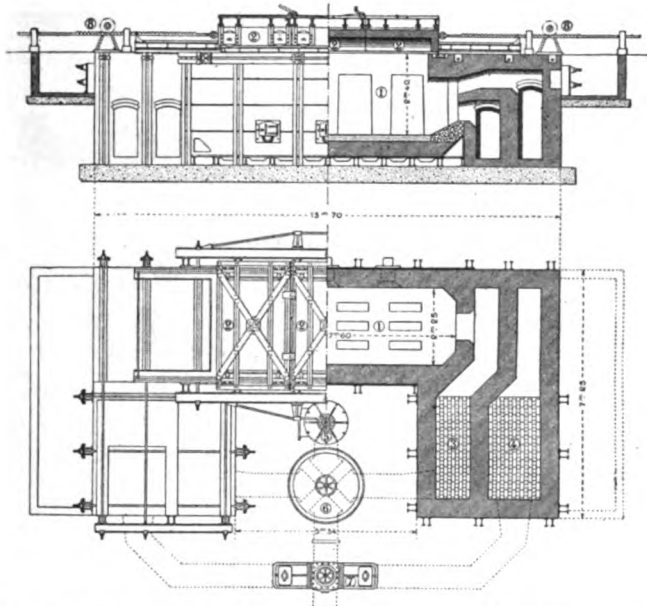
Arrangement of soaking pits in French plant operated on producer gas. 1, heating chamber; 2, rolling lids; 3, gas regenerator; 4, air regenerator; 5, gas regulating valve; 6, gas-reversing valve; 7, air-reversing valve; 8, rack and gear for moving lids.
